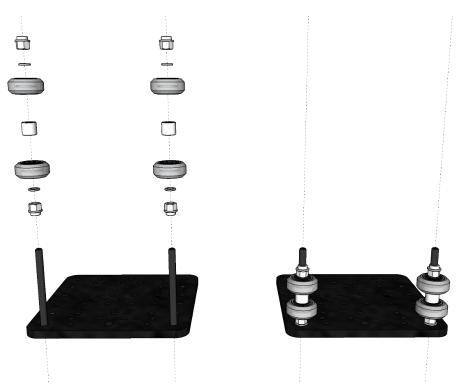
X-Carriage Assembly: Eccentric Side stack up
